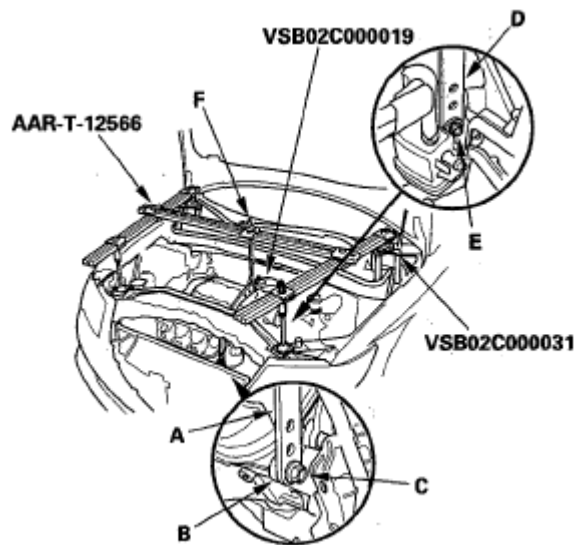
Identifying Engine Hanger Balancer Bar (VSB02C000019) On Cylinder Head
